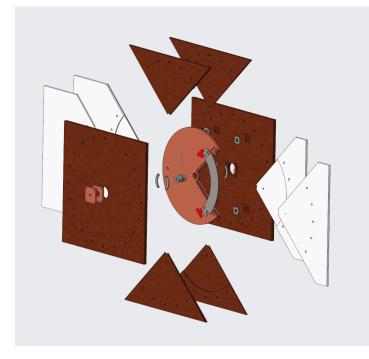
Exploded view of the whole GREC engine rotated 180 degrees
